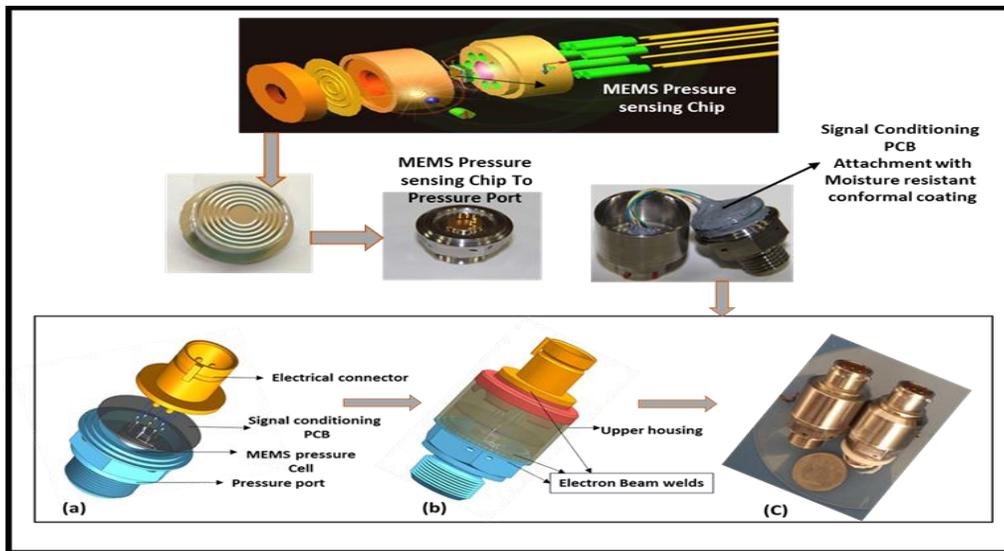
MEMS pressure transducer assembly and packaging (a). Transducer sub-assemblies (b). Final packaging (c). Realized 20 Bar Transducer
